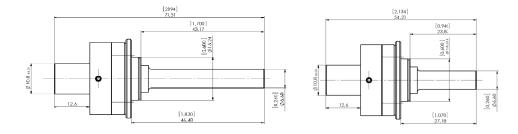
Outline dimension of AIM 1/4" coldfingers (standard left, short right)
